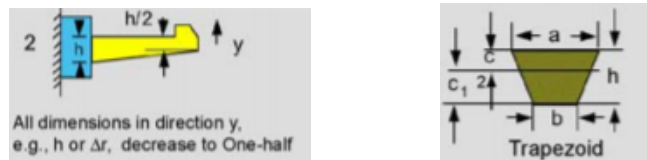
Design for trapezoidal beam deflection (type of planar view design on left and shape of cross section on right)
